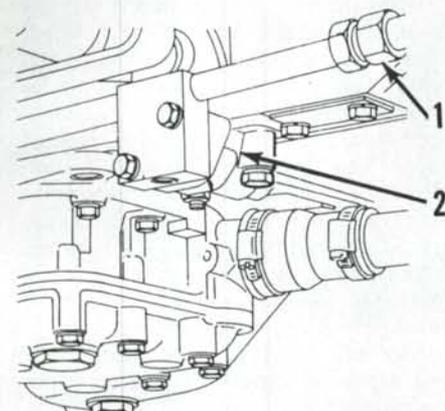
On models with front mounted pump, system relief valve (2) and air relief valve are located in pump outlet pipe (1) between pump and external oil filter.
